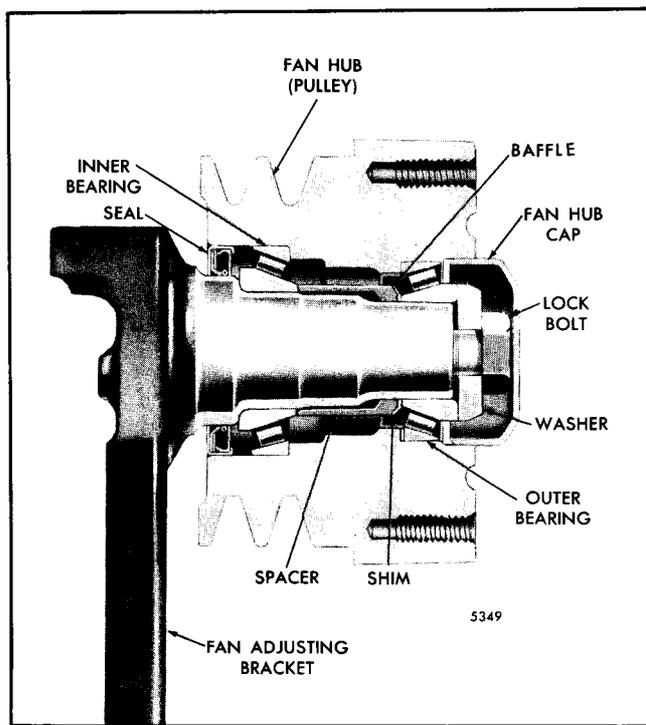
Roller Bearing Type Fan Hub Assembly (In-Line Engine)
